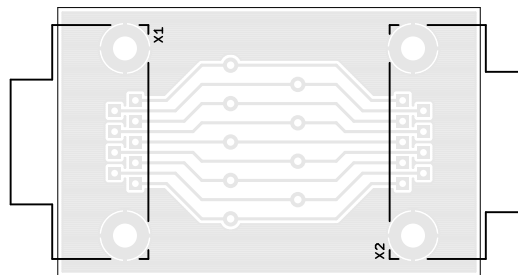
Board top view (with bottom copper tracks) showing connectors, test points and wired components
